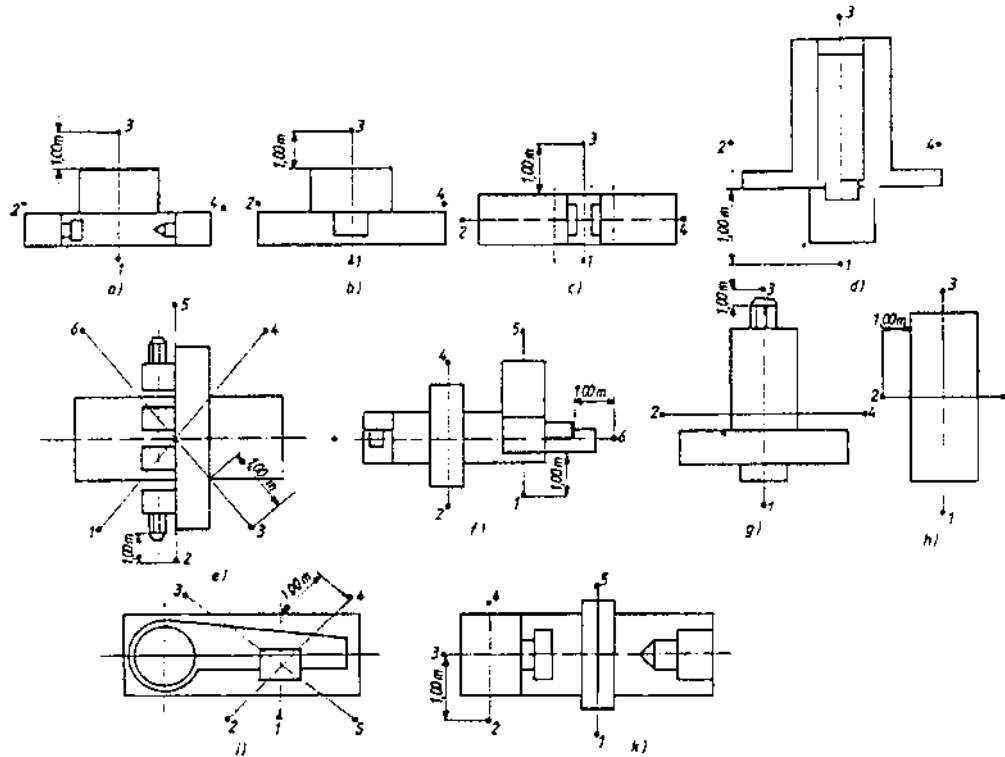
Placement of the measuring points on different types of machine tools: (a) universal grinding machine; (b) surface grinding machine; (c) centerless grinding machine; (d) shaping machine; (e) portal milling machine; (f) reaming and milling machine; (g) vertical milling machine; (h) radial boring machine; (i) boring machine with column; (k) normal and revolver lathes.
